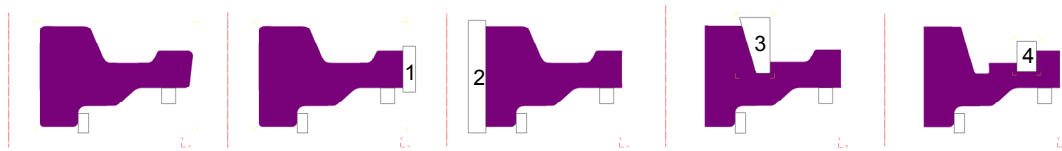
As-forged geometry, left; boolean machining passes 1-4 at right.
